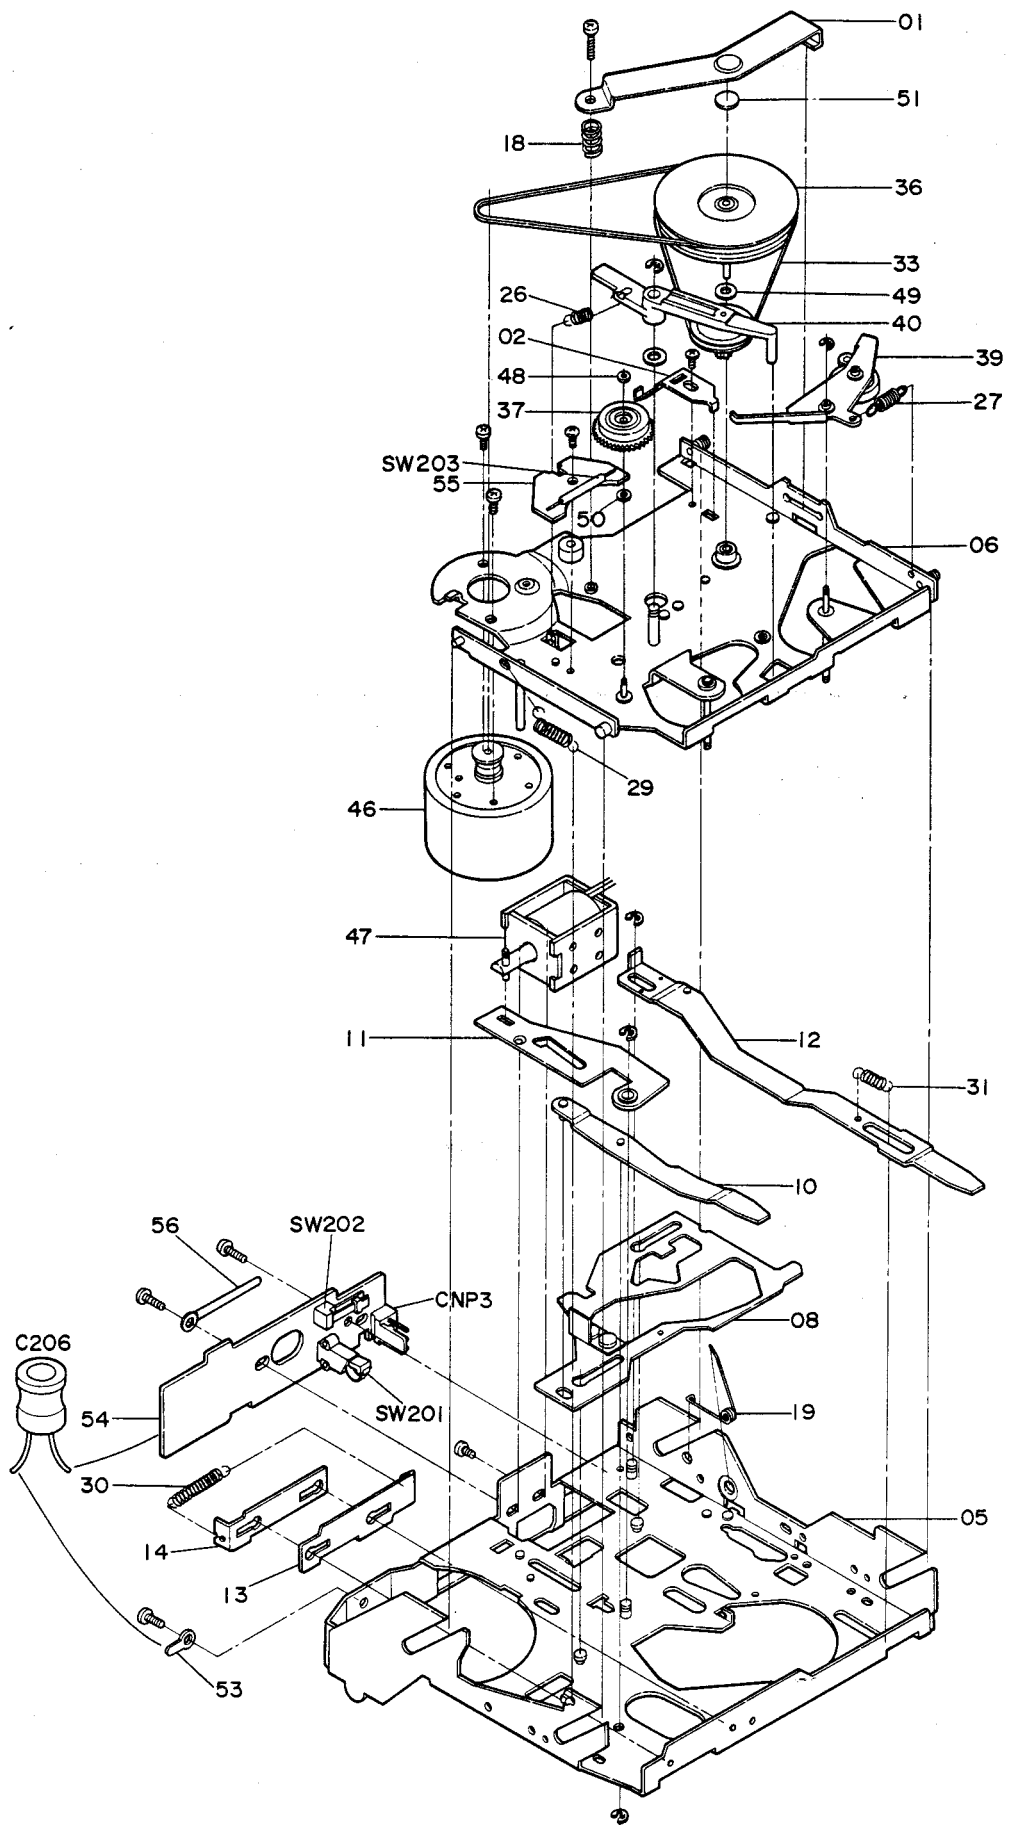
MECHANISM EXPLODED VIEW (LOWER SIDE)
